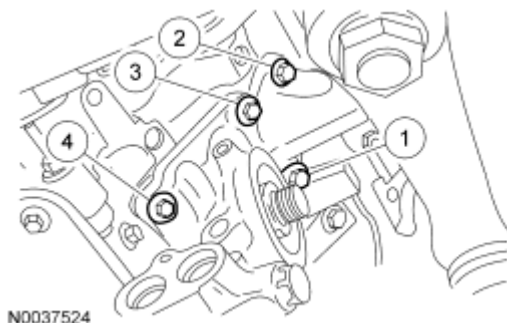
Oil Filter Adapter Bolts Torque Sequence
